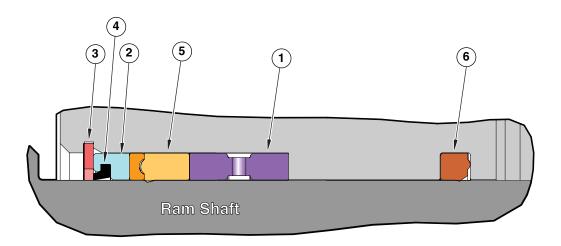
Ram Shaft Seal Assembly - Manual Lock
